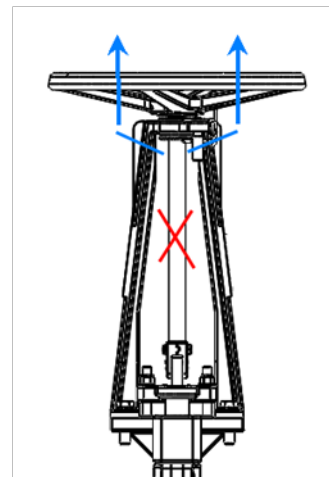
Knife Gate Valve with Handwheel or Chainwheel Actuator, Vertical Lifting
